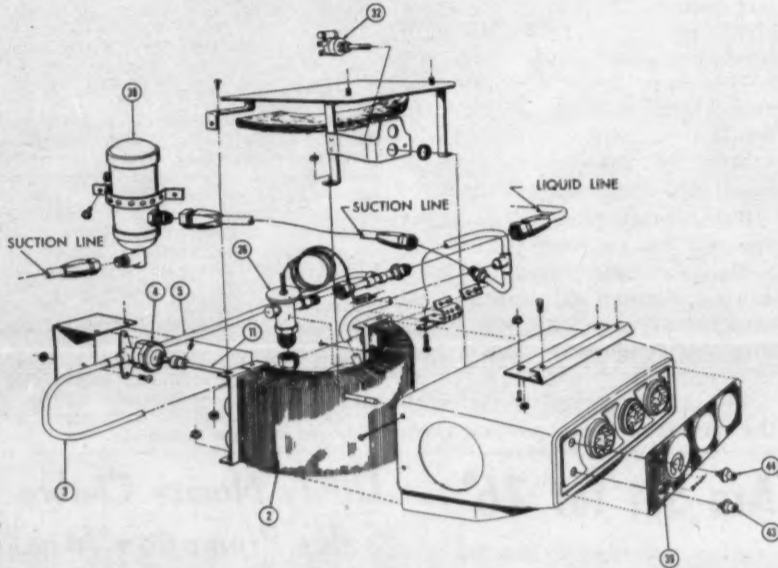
Exploded view of evaporator assembly of 1957 Vornado unit with by-pass valve. (Fan and drain pan assembly, which is same as in Fig. 4, omitted.) Key: 2—evaporator; 3—by-pass to suction line; 4—by-pass valve; 5—liquid line to by-pass valve; 11—by-pass valve control rod; 26—expansion valve; 28—accumulator; 32—fan switch; 39—cabinet insert; 43—fan switch knob; 44—by-pass valve control knob.
